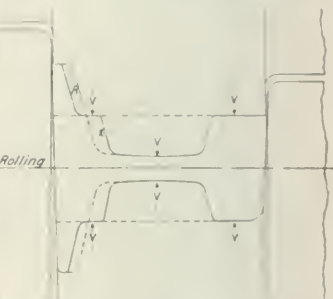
Roll Groove for Flat-Bottom Double-Head Rail.
